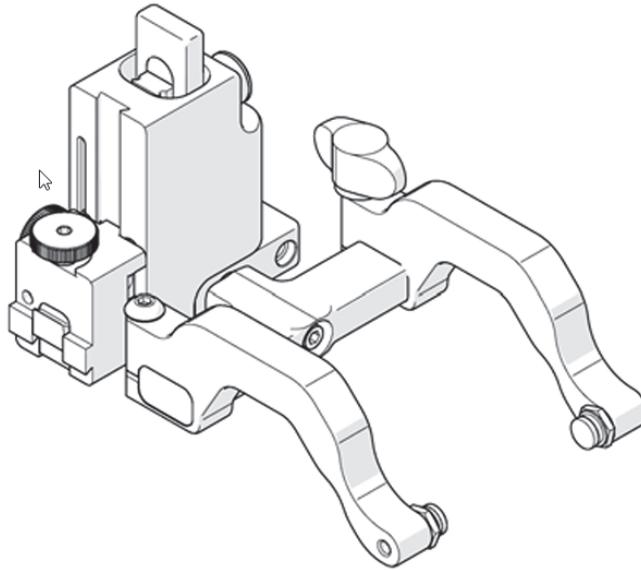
HydroFORM mounted on a ChainSCANNER with pivoting probe holder and fork kit
